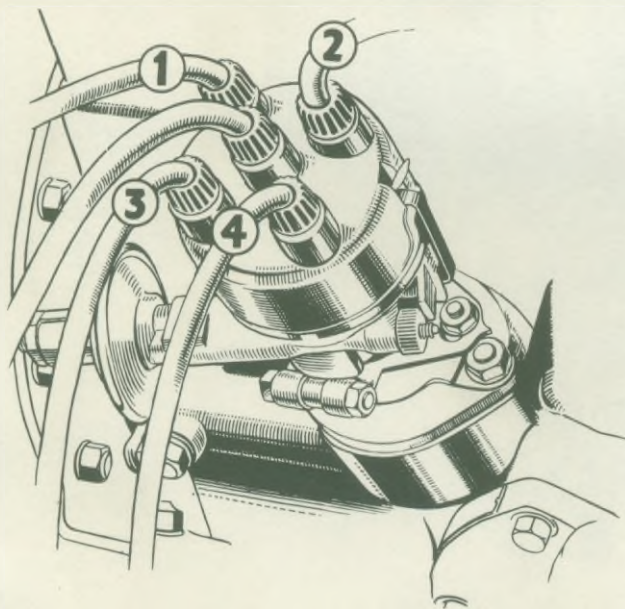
Showing ignition timing adjuster and wiring of distributor
